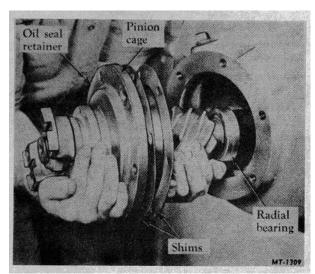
Removing Pinion and Cage Assembly (rear rear axle shown).
